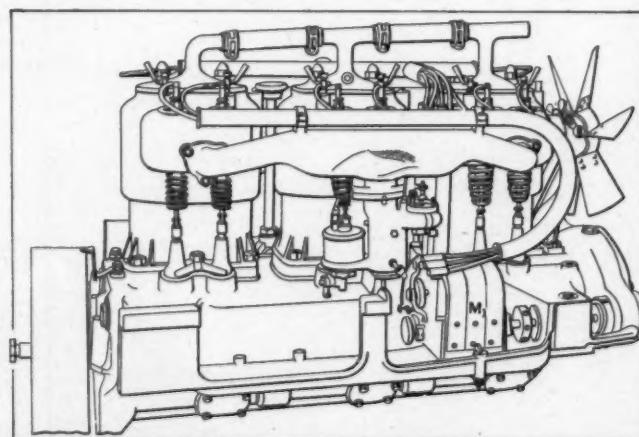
Right-hand side of the six-cylinder motor, showing the location of the Bosch magneto and the installation of the Stromberg carburetor
